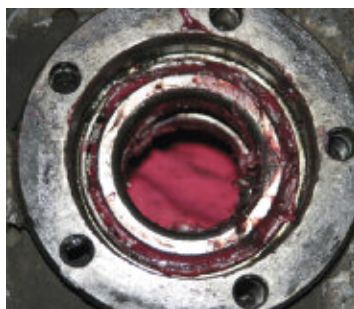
Outermost bearing in place. Note: check bearing races for "bluing", if clean and without grooves or wear marks, most often these can be reused and left in place with new bearings.
